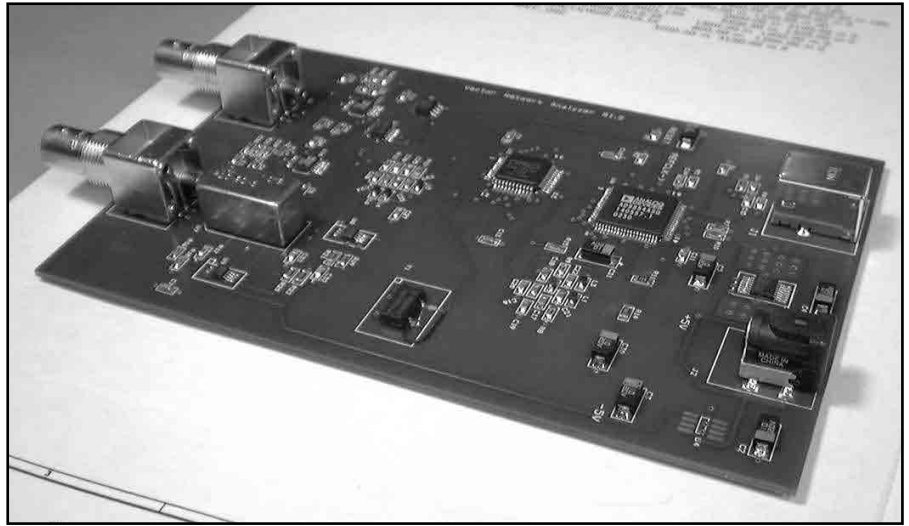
Photograph of the assembled prototype board. The 4-layer board is approximately 4x6 inches.
